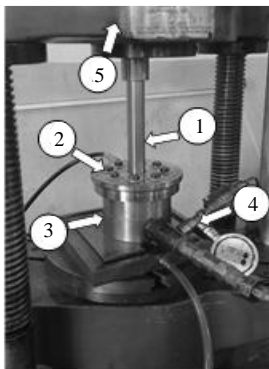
Components of the die set 1- punch, 2- blank holder, 3- die, 4- pressure gauge, 5- forming machine
